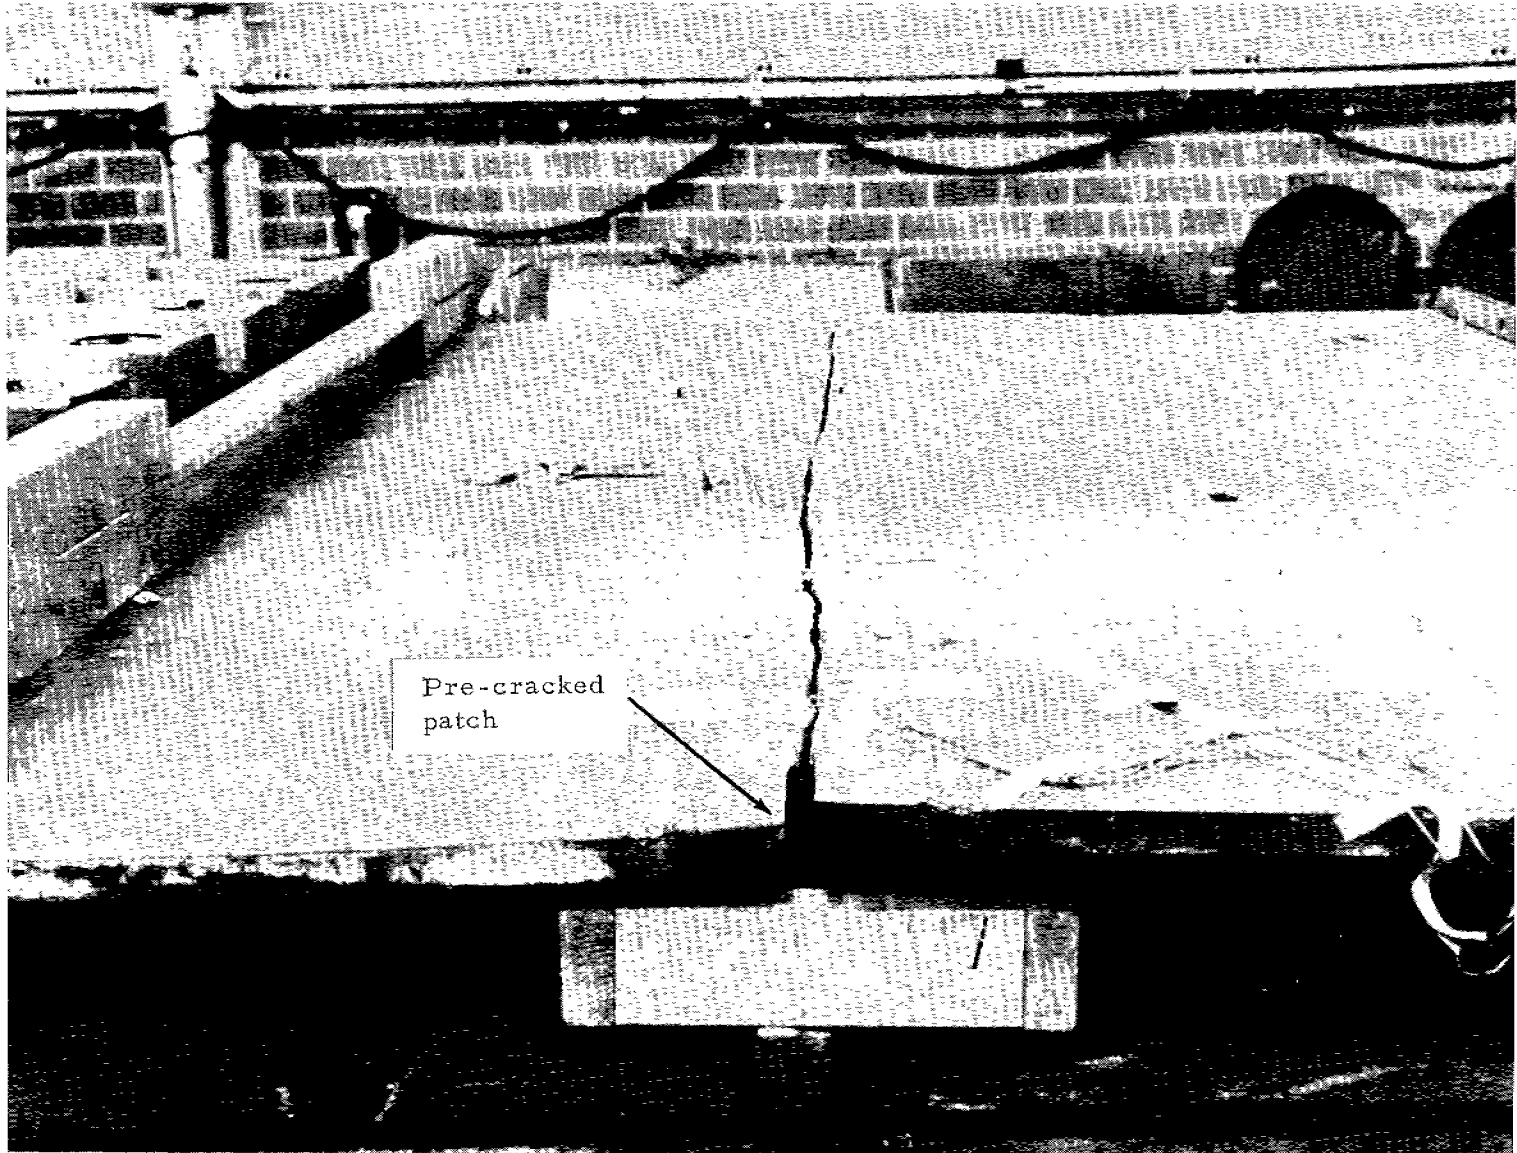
Overall View Of The Fracture - Test B1; Specimen Configuration: Fatigue Crack Generated At The Tip Of A 6" Edge Slot; Test Temperature: +40°F; Fracture Stress: 40,300 Psi On The Gross Section; 42,400 Psi Avg. On The Net.
